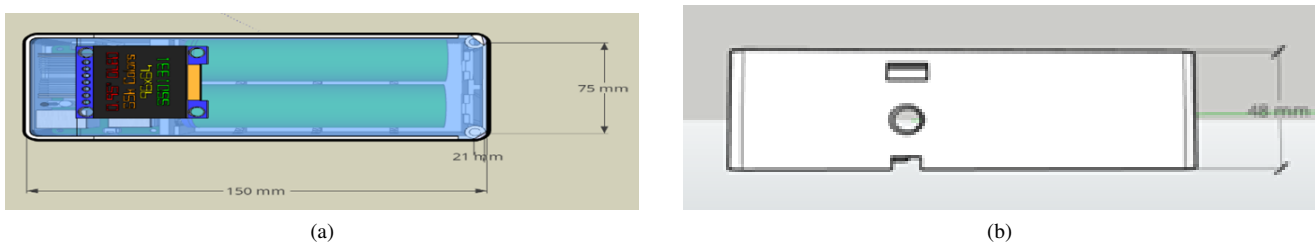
(a) The Mechanical Design of Power Storage Top View; (b) Mechanical Design of Power Storage Side View
